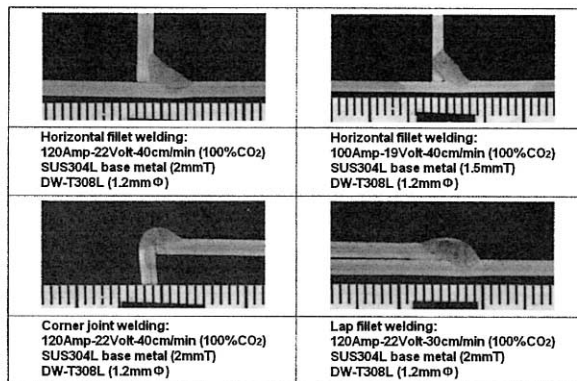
DW-T FCWs offer a wide range of applications in sheet metal welding of around 2-mm thick stainless steels
